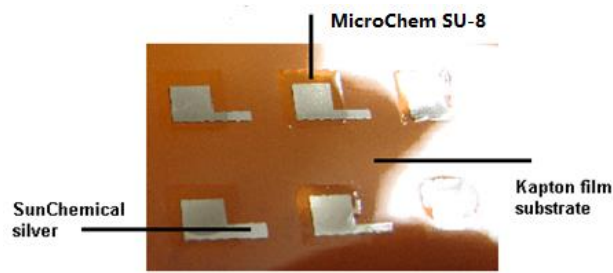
Isometric view of pneumatic dispenser printed capacitor two layers including bottom electrode and dielectric layers.
